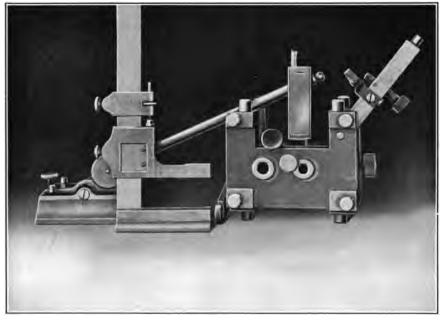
MAKING A MEASUREMENT IN A JIG
